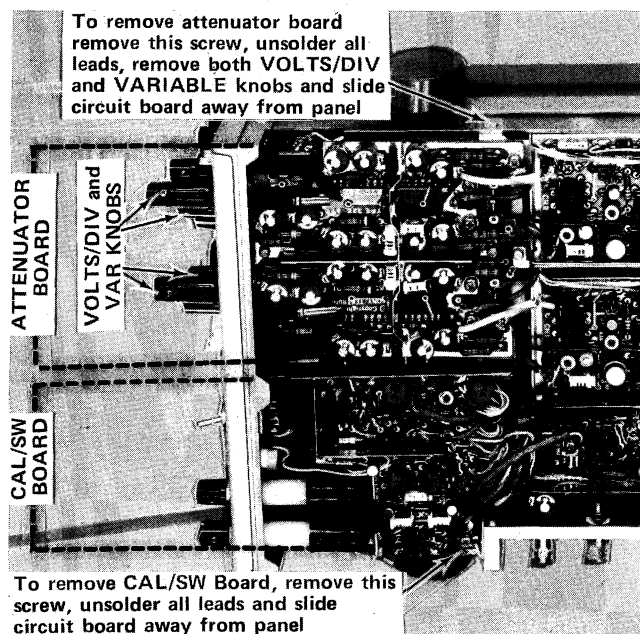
Calibrator/Switching circuit board and attenuator circuit board removal.
